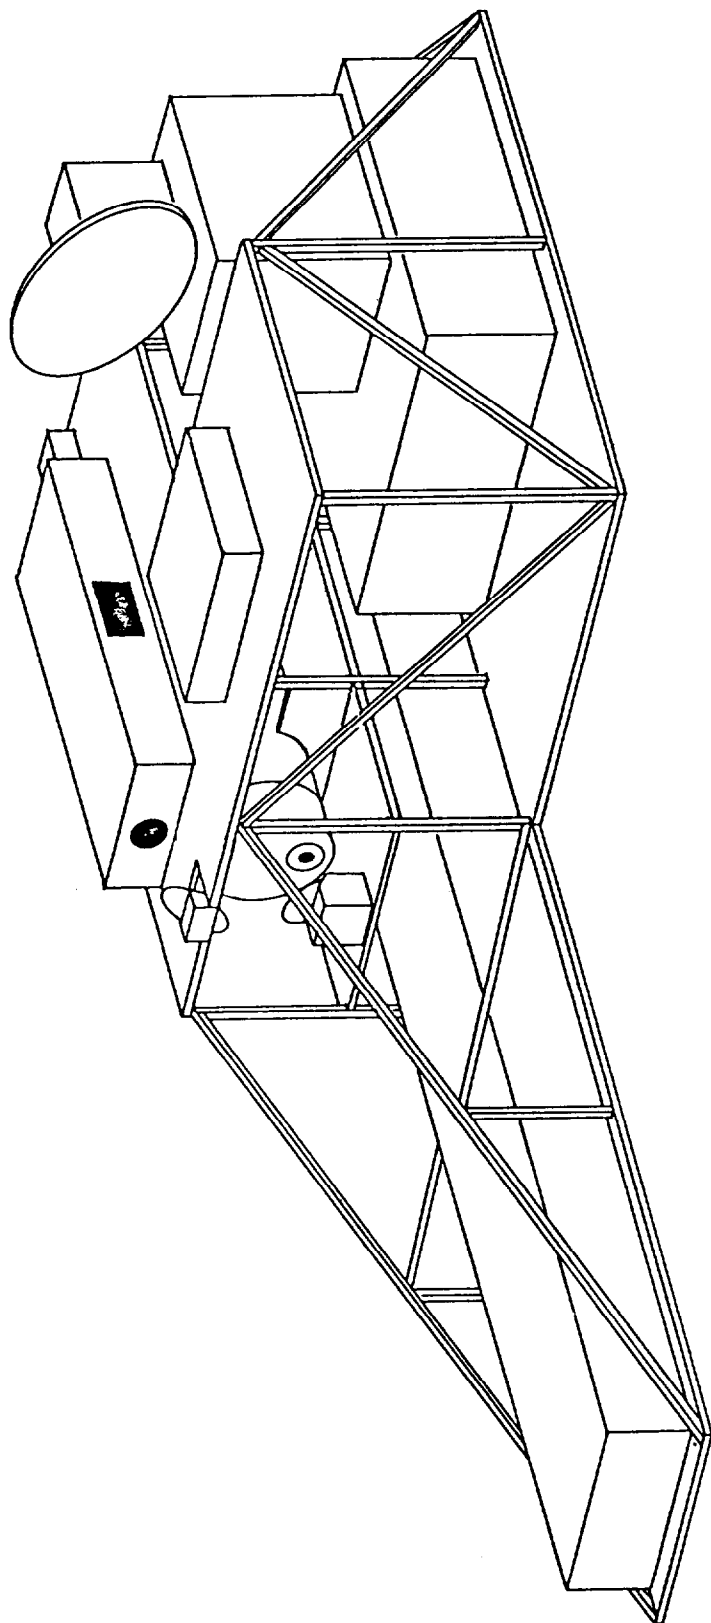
CONFIGURATIONAL DRAWING OF L.I.O.S. SYSTEM ASSEMBLY
